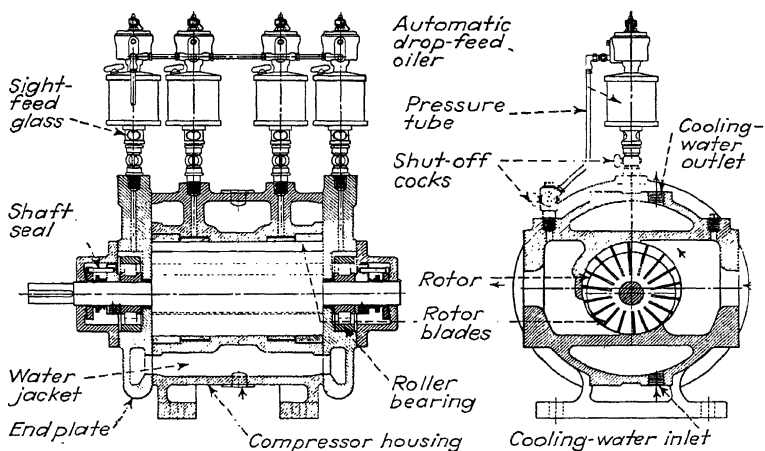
Rotary sliding-vane compressor equipped with automatic drop-feed oilers.
